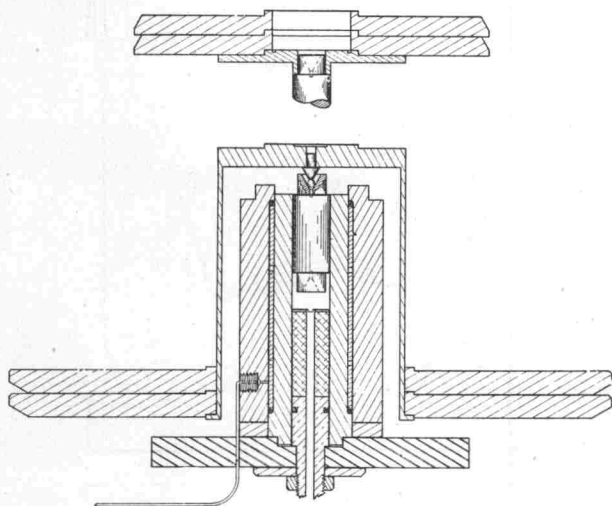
Sectional view of N.B.S. controlled-clearance air-lubricated piston gauge used as a pressure standard from 1/2 to 35 atm
